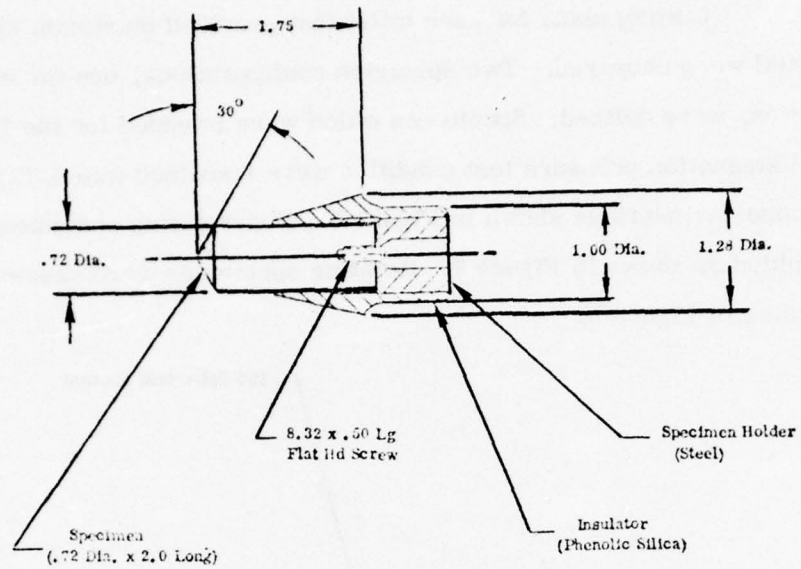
Non-Rotating Specimen Assembly (0.721-Inch Diameter)
